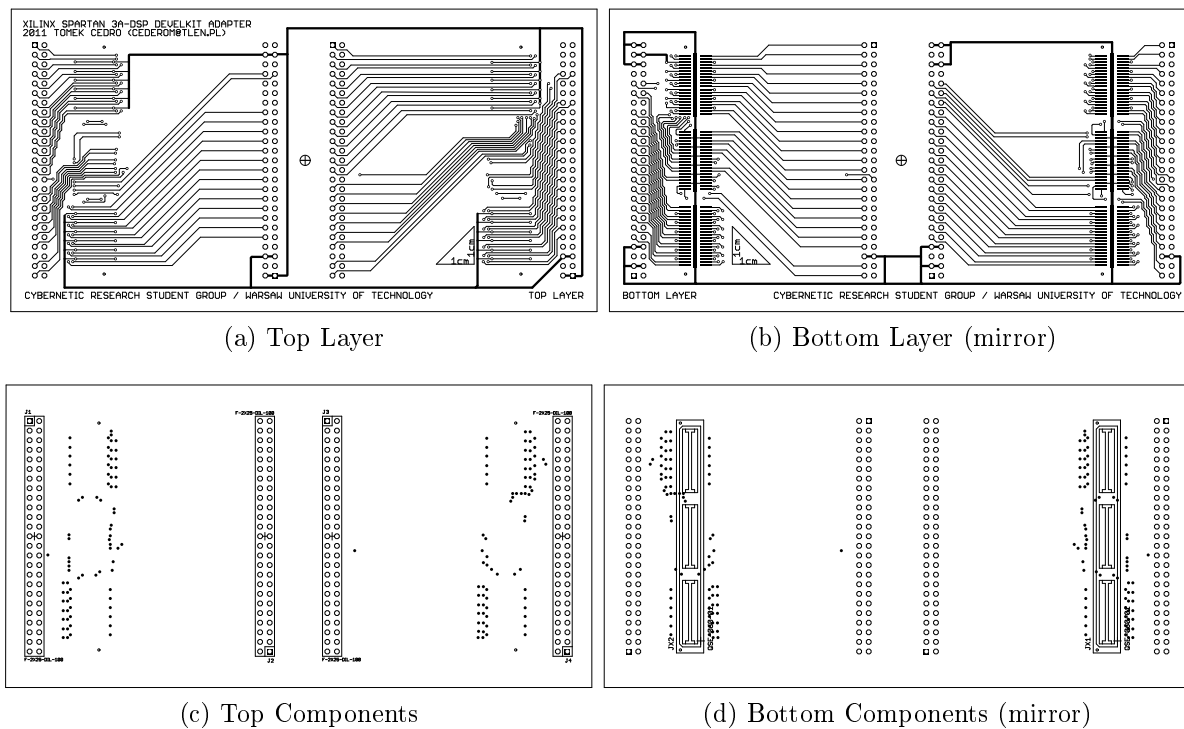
CeDeROM BCI Xilinx Spartan 3A-DSP Development Board QSE-to-Goldpin adapter PCB design.
